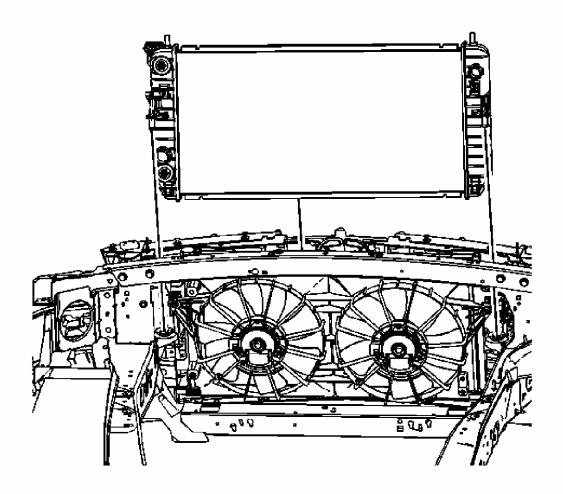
Removing/Installing Radiator Courtesy of GENERAL MOTORS CORP.
